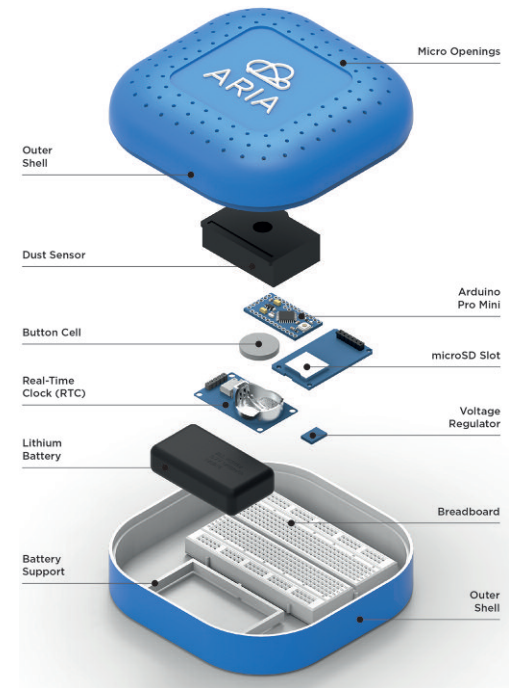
, 7 - The Device: Axonometric exploded view; Main dimensions and sections (quotes in mm).
